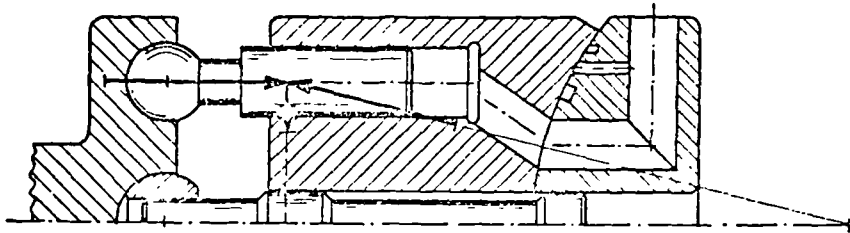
SUSPENSION OF THE CYLINDER BLOCK WITH KIDNEY PORTS ON REDUCED PITCH RADIUS AND SPHERICAL VALVE FACES FOR COMPENSATION OF THE TILTING MOMENT.
